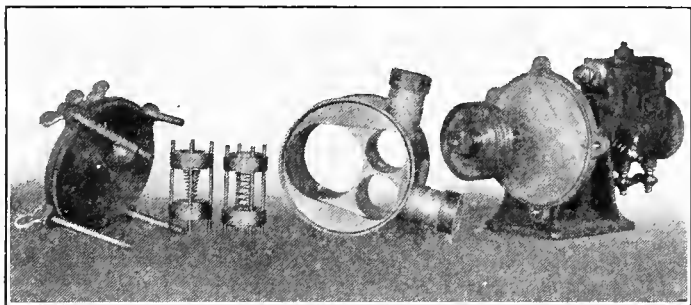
The Burrell Sanitary Milk Pump taken apart for cleaning.
